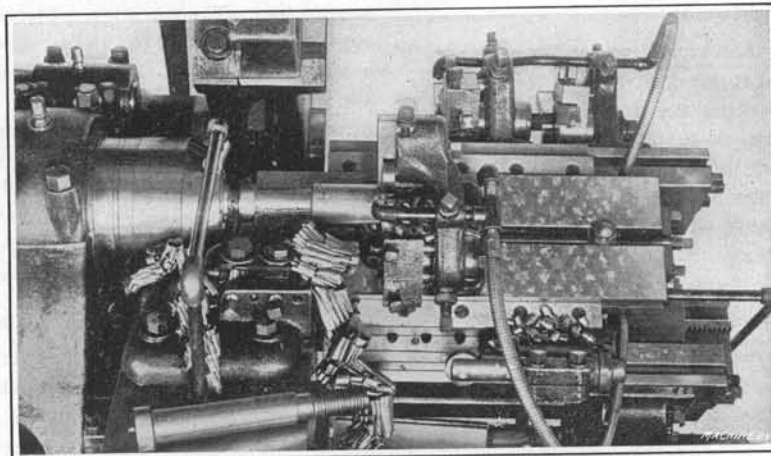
Standard Turner and Flat Forming Tool working together on Shoulder Screw
